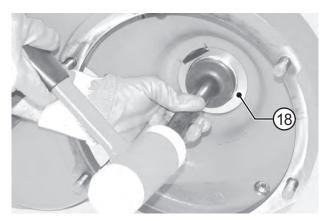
Using a plastic hammer and driver, loosen the bearing (19) and the oil shield plate (18) only if necessary.
